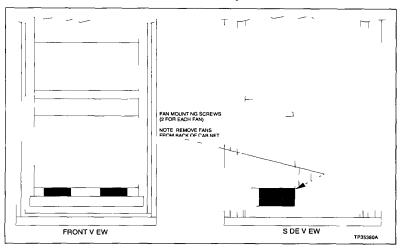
Fan Assembly Removal for IIOIS40A Cabinet
